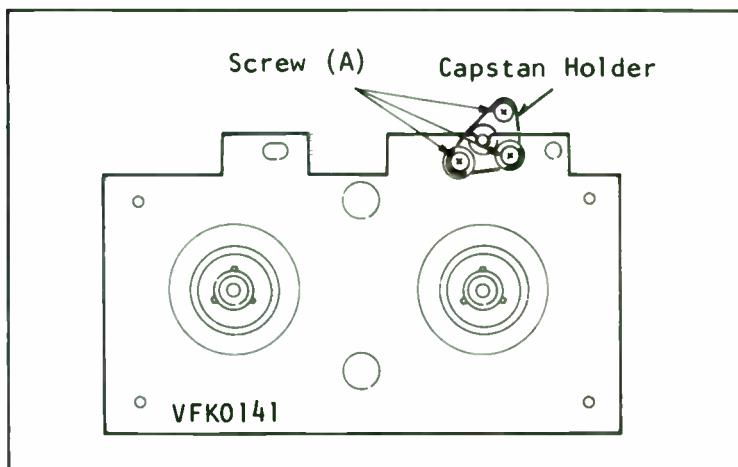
Capstan holder adjustment (courtesy of Magnavox).
